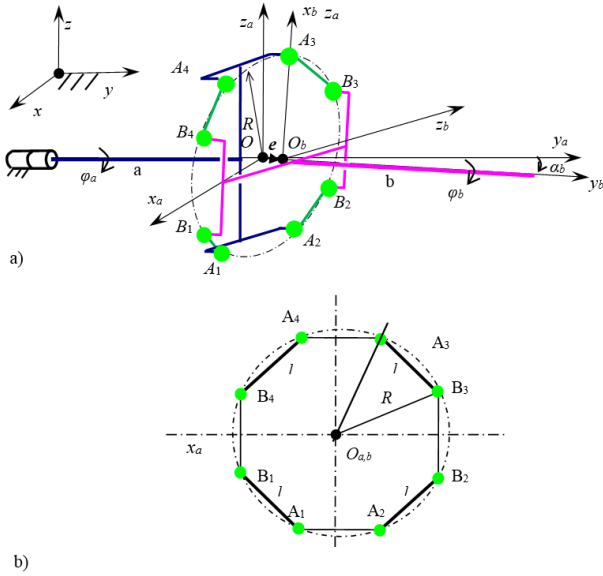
Scheme of the 4-link coupler mechanism in general pose (a), Dimensions of the coupler in $x-z$ plane (b)
